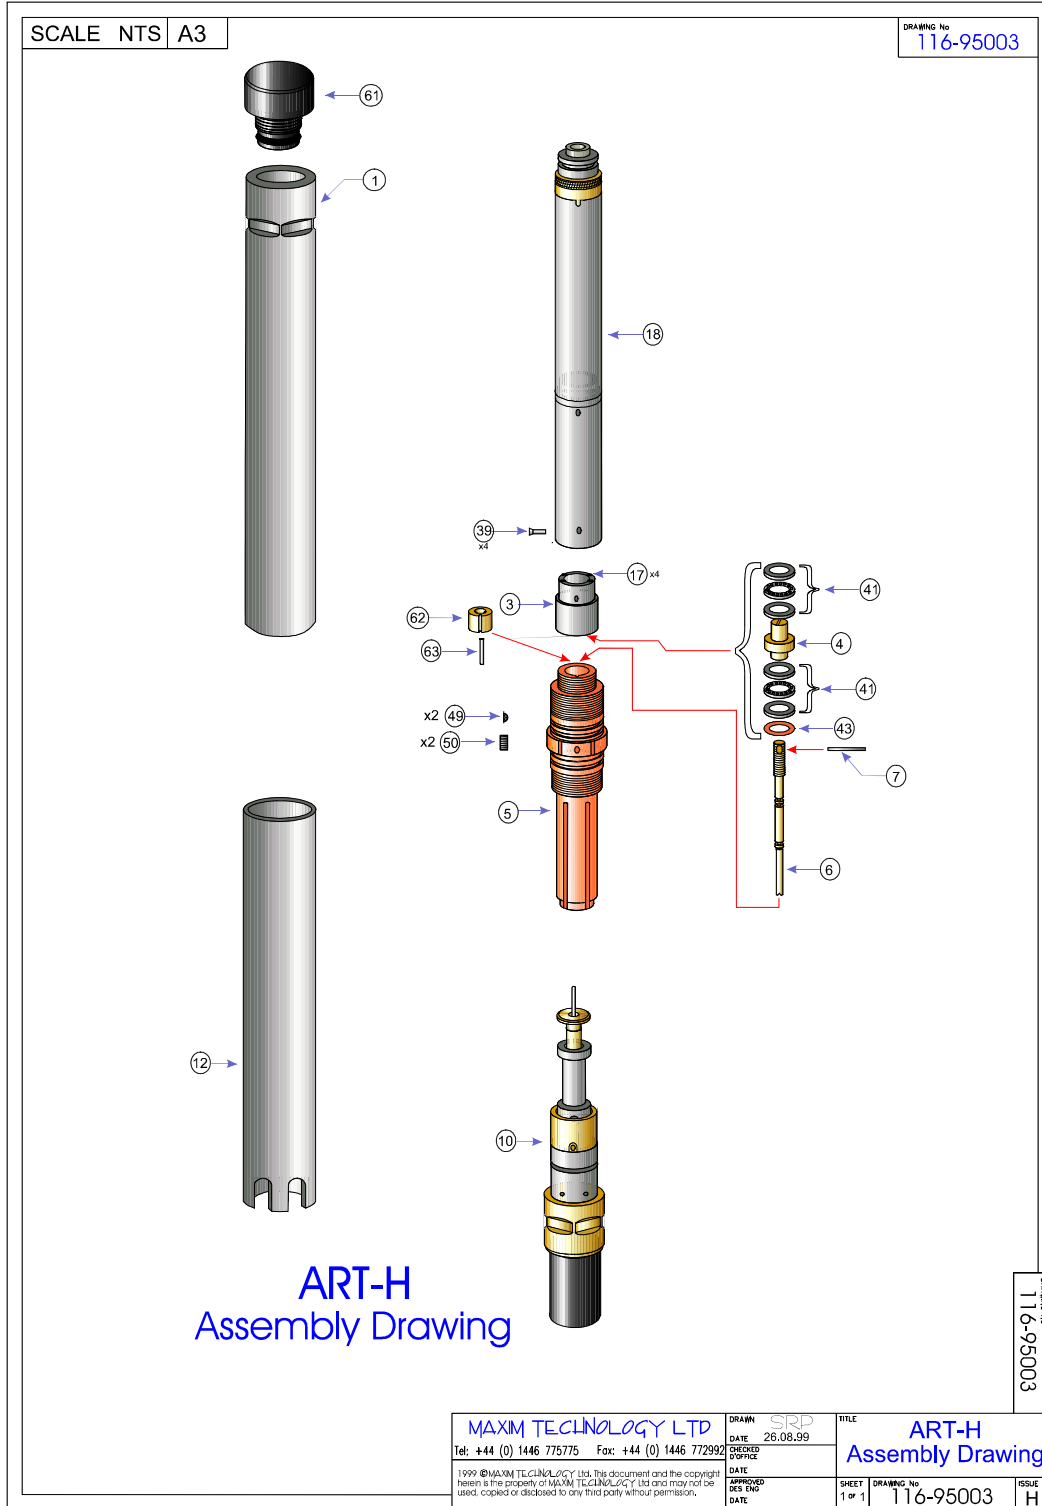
Exploded Assembly Drawing, ART-H - 116-95003-H
